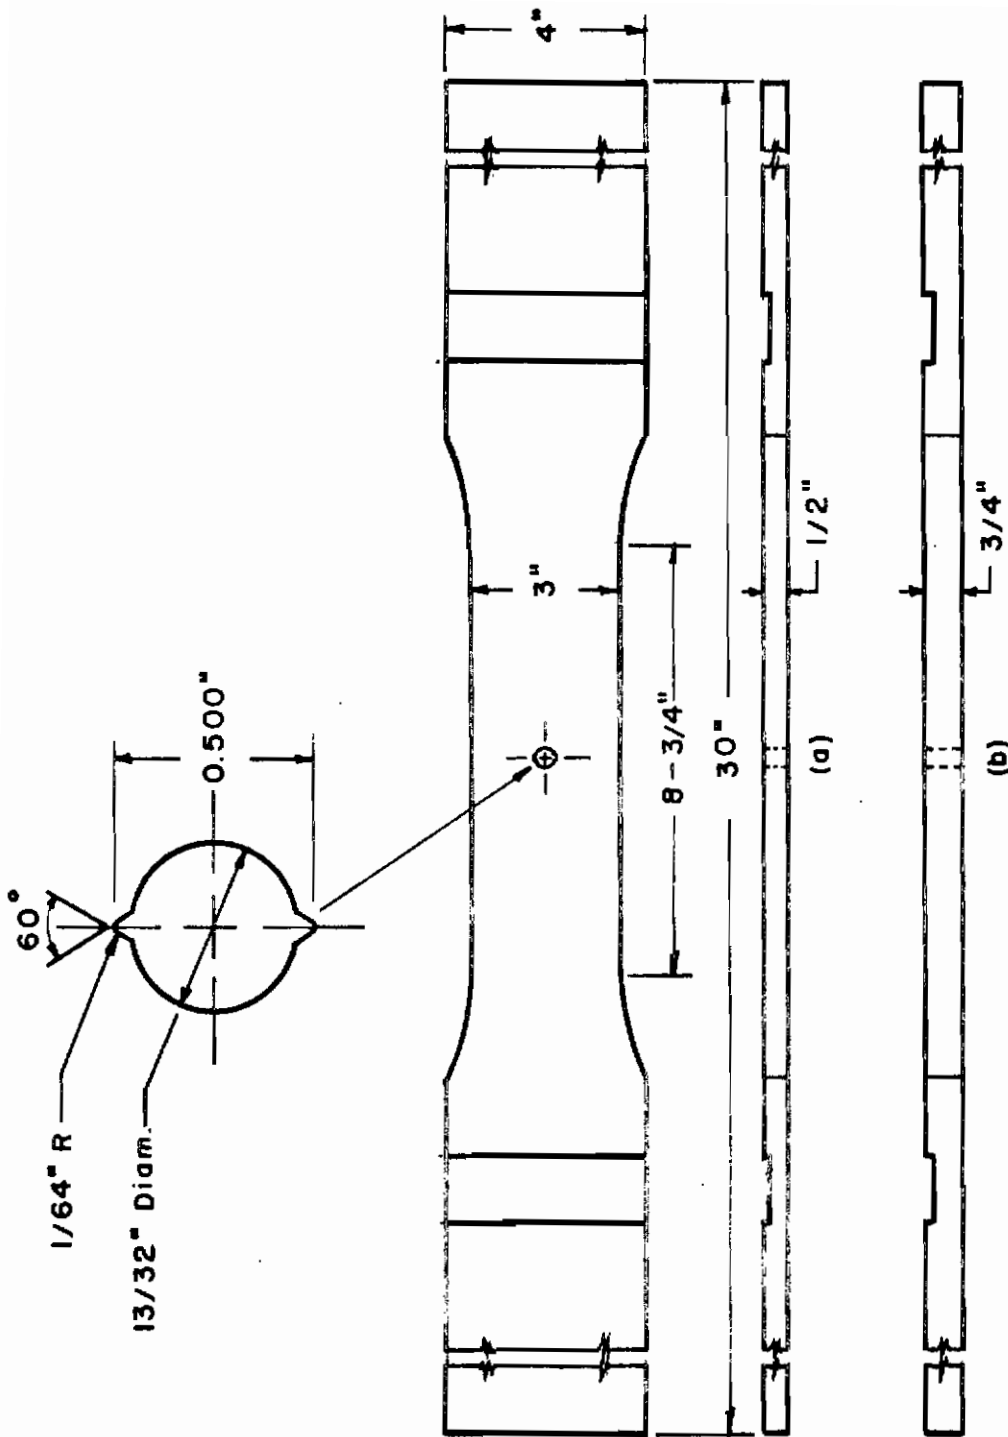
CENTER-NOTCHED FATIGUE SPECIMENS
